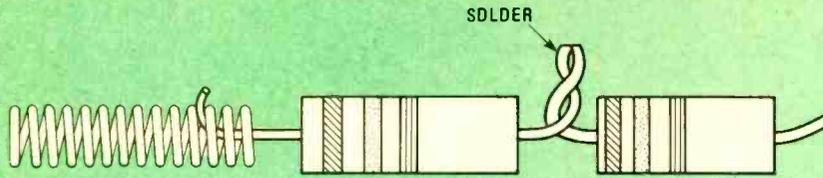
THE END OF THE RESISTOR string is passed through the coils of the small spring that comes with the probe handle. This spring is passed over the end of the probe tip inside the handle. Notice that the resistor leads are twisted tightly and cut short after soldering.
